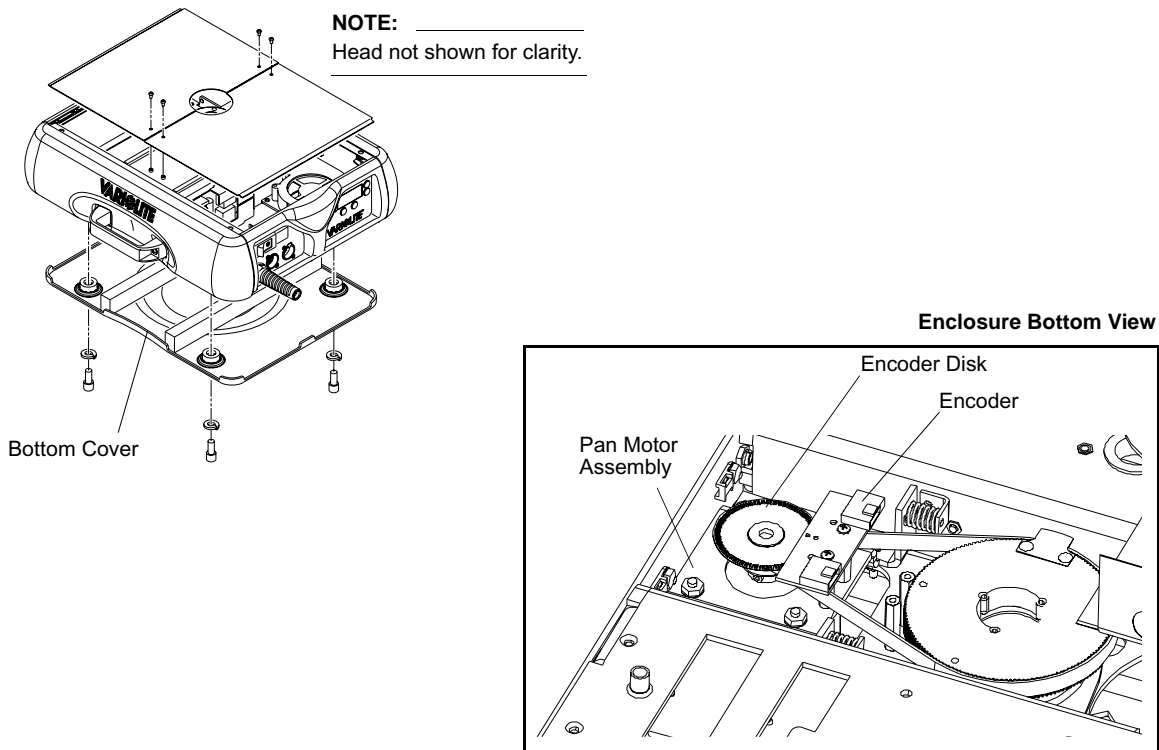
VL3000 Pan Encoder PCB Replacement
